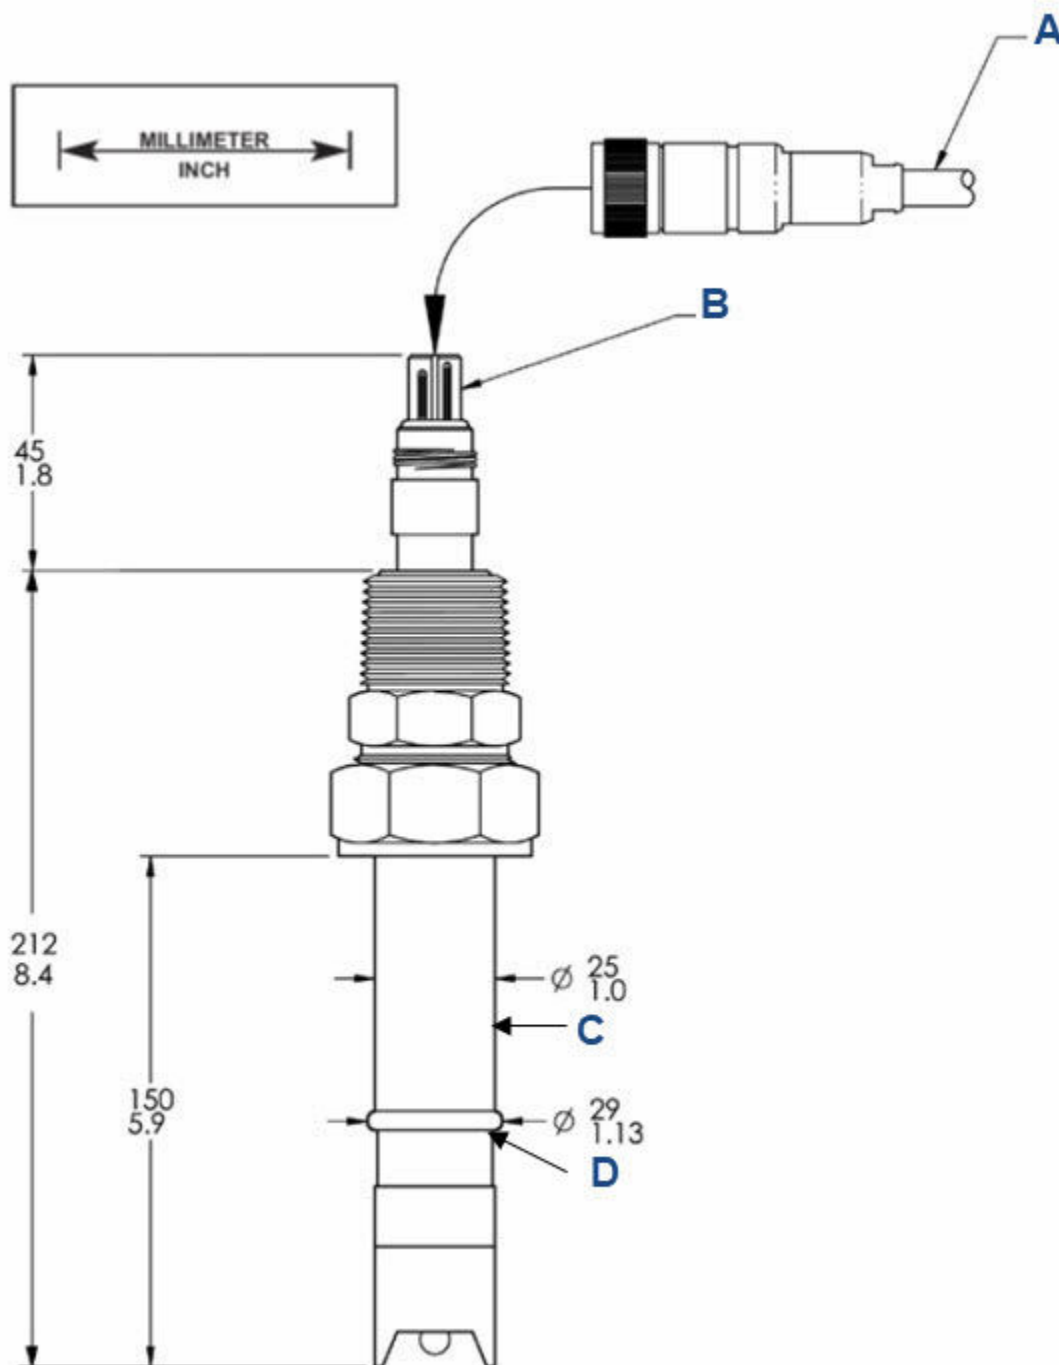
Rosemount 3500VP Sensor Dimensional Drawing
